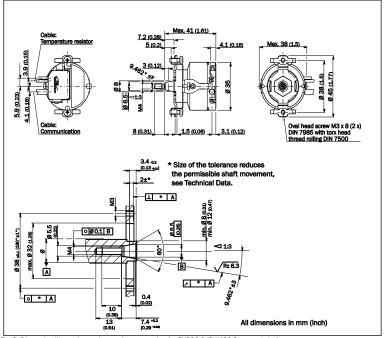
Dimension illustration and mounting suggestion for EKS36-2/EKM36-2 tapered shaft
